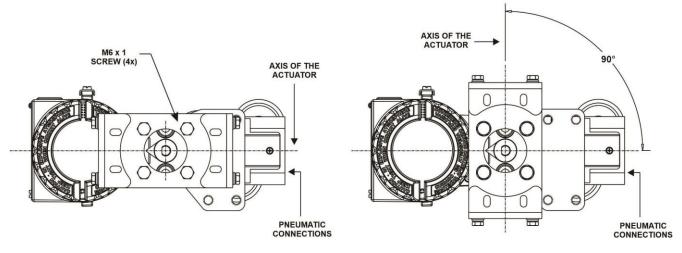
Positioner assembly orientation relative to actuator axis
